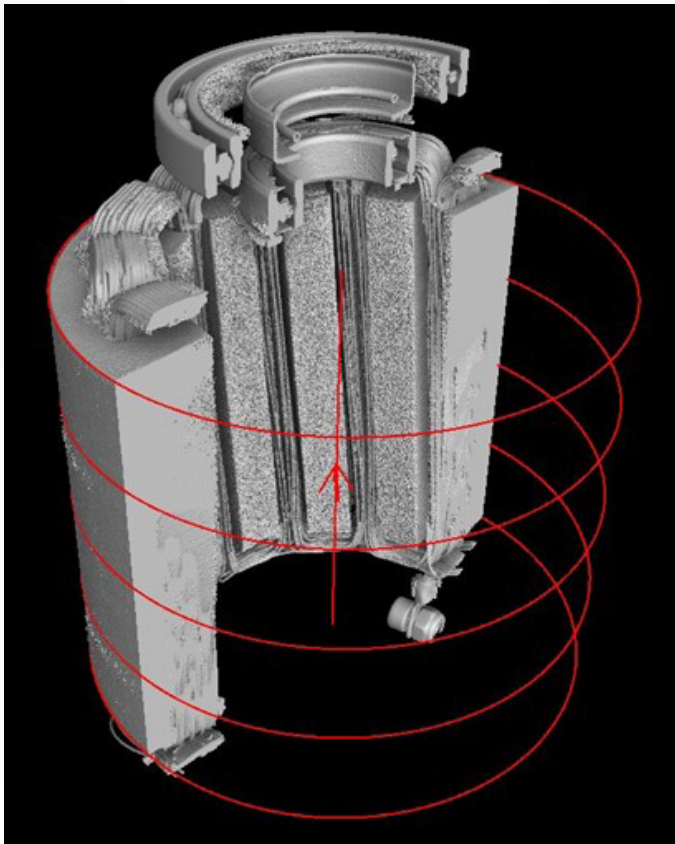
Geometric element (cylinder) used for unroll view definition.
